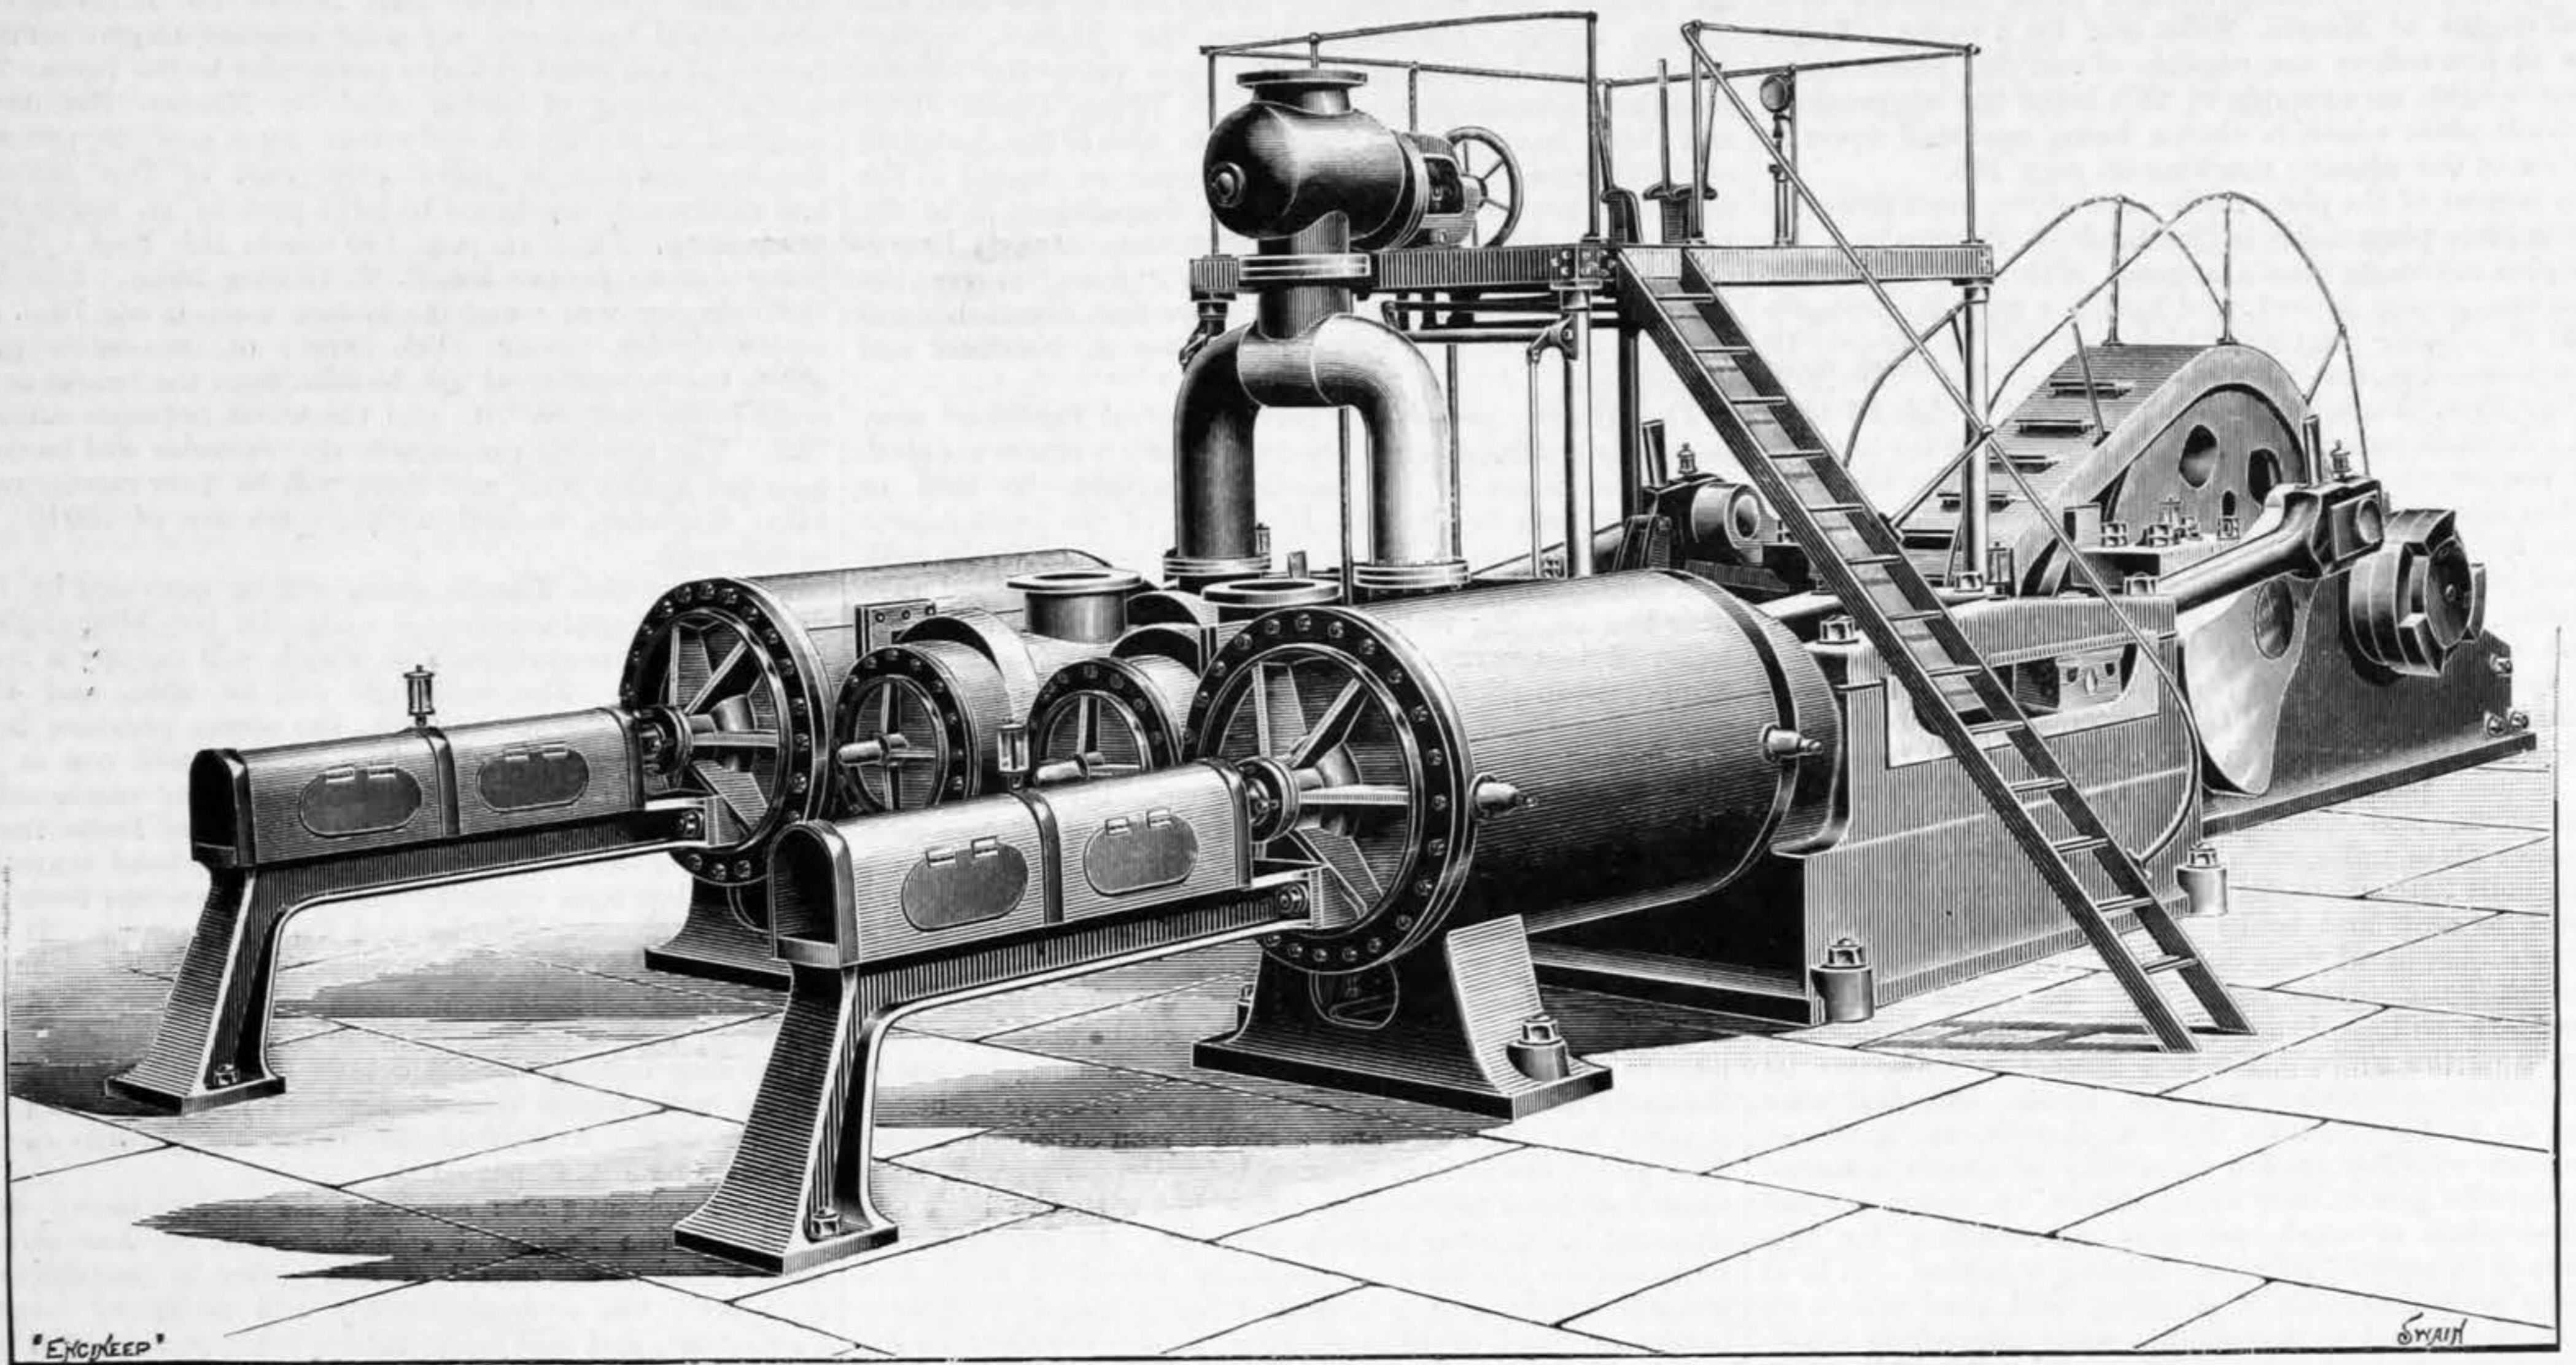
REVERSING ROLLING MILL ENGINES, PLATE MILLS, PARKHEAD FORGE
